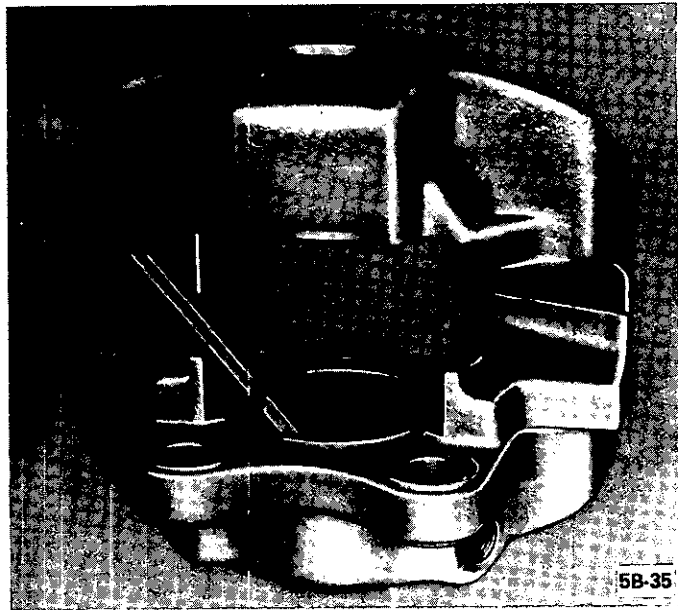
B-35 Removing Rubber Fluid Seal From Caliper Bores
